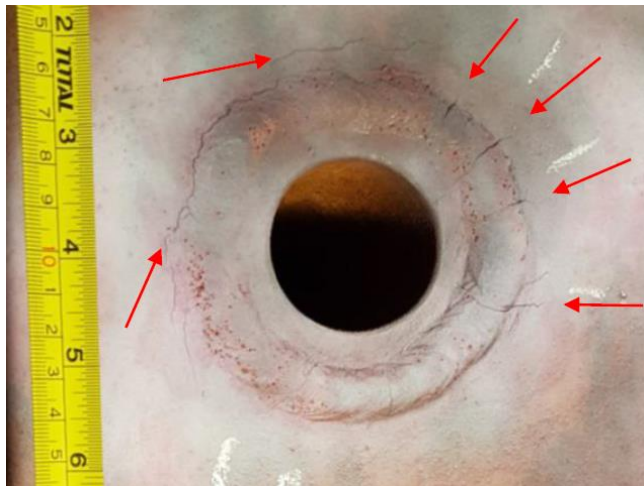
New cracks appeared on nozzles near the welding zone.
